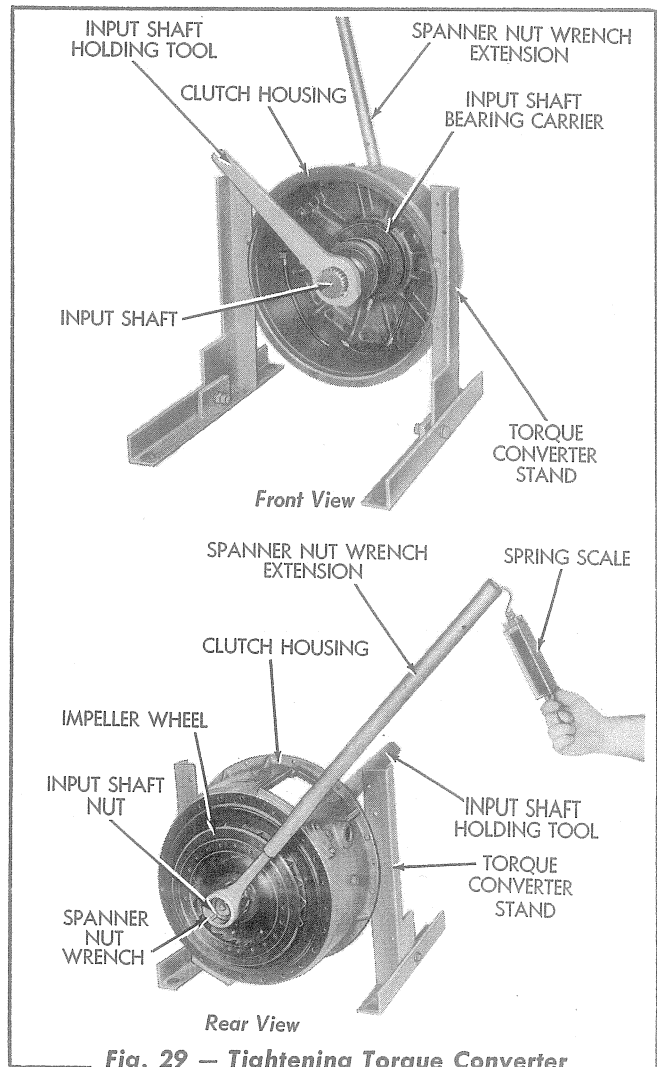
Tightening Torque Converter Input Shaft Nut
